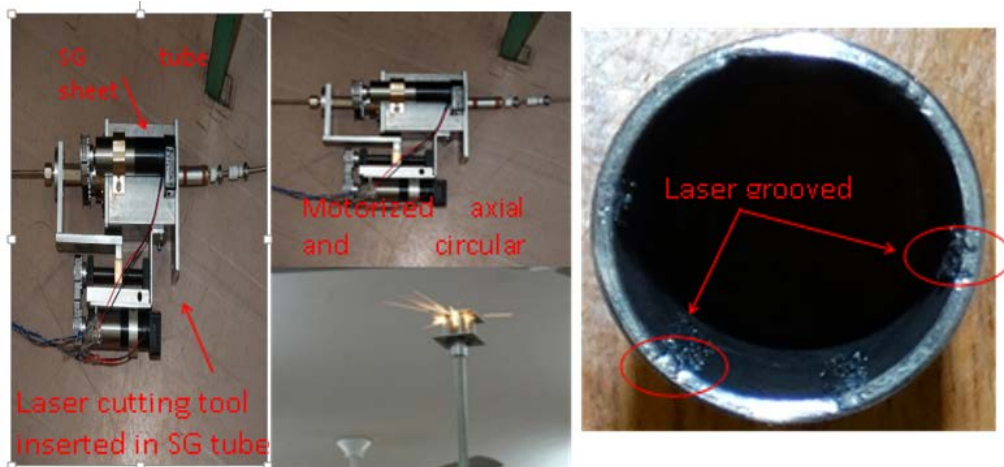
Laser cutting mock up, fixture for laser cutting of steam generator (SG) tube and laser grooved sample of SG tube.
